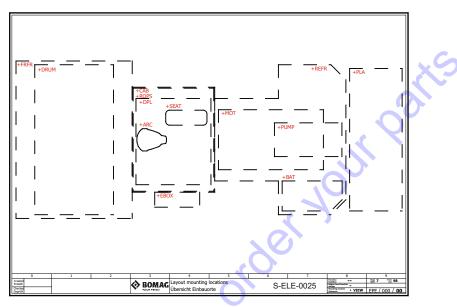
Installation locations with structural symbols Overview of structural symbols & Fig. 51
